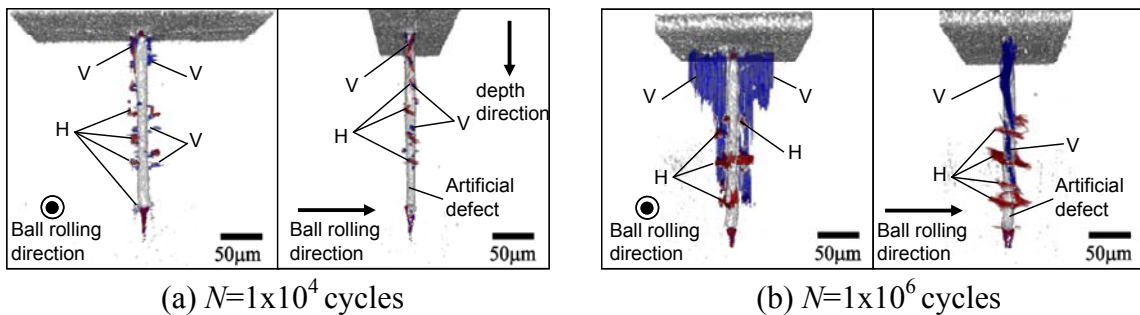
CT images of artificial defect and cracks (V :vertical crack, H :horizontal crack).
